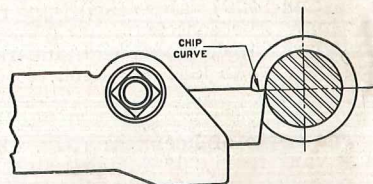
A.—A cutting-off or parting tool as ground for machining either steel or cast iron. This tool has front clearance and side clearance on both sides but no side rake. The chip curve, illustrated, is not necessary when machining cast iron. The cutting edge should be set exactly on center.
